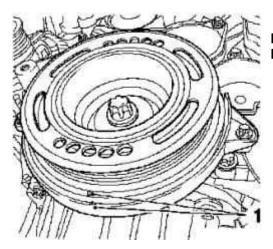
Install the crankshaft position at top dead center (TDC), piston cylinder number 1: 1 - Tags
